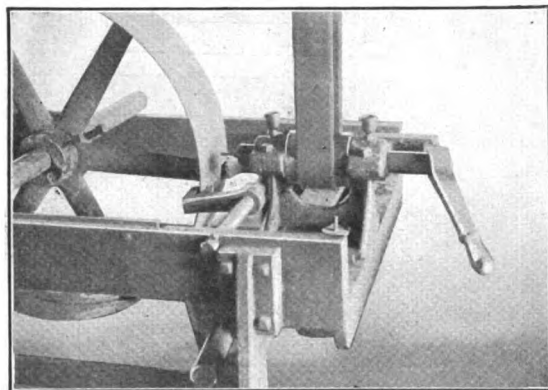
CLOSE VIEW OF PULLEY-HOLDING JAWS
